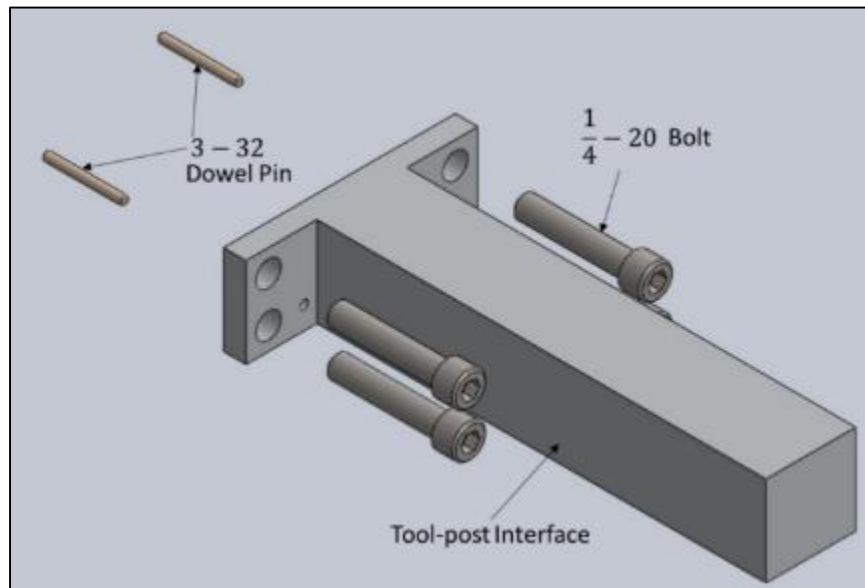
Tool-post interface assembly for first design of measuring instrument
